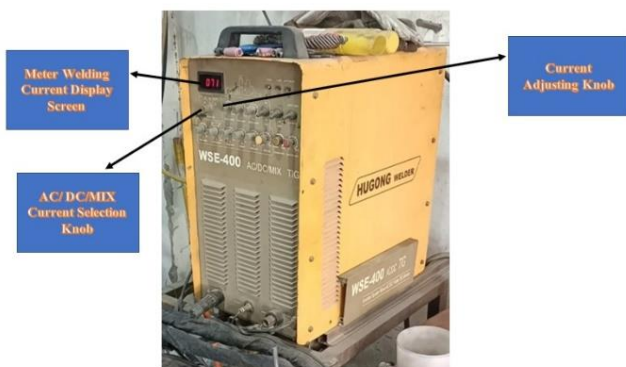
WSE-400 AC/DC/MIX TIG Welding Machine
